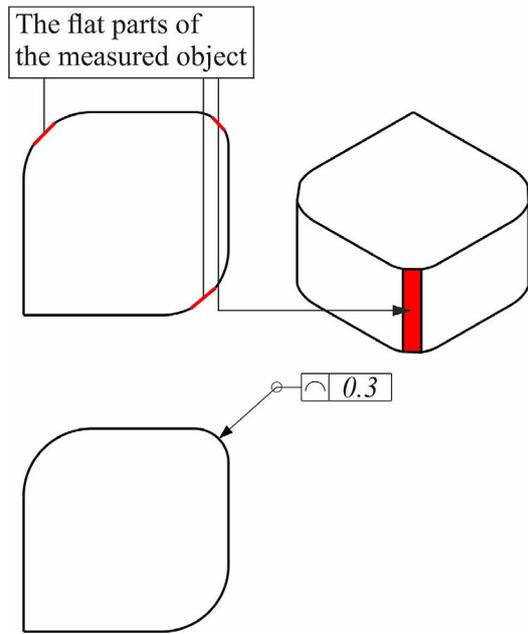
The workpiece to be measured with the marked flatness of the considered surfaces
